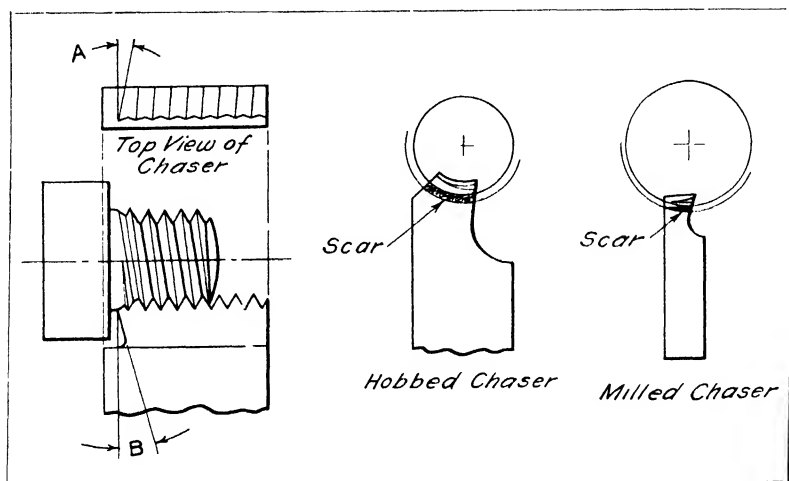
(Left Diagram) Chaser Ground to Give Chip Clearance to Help in Threading Close to a Shoulder. Diagrams at Right Show how Chasers are Scarred by Striking Shoulder on Work
